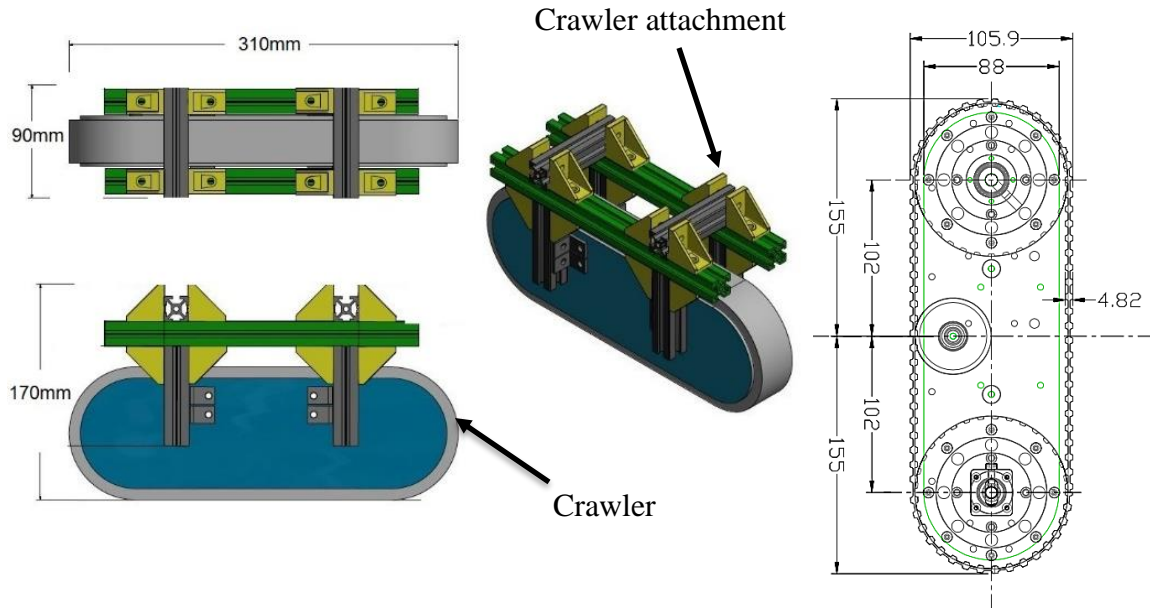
Tracked-wheel design and internal dimensions inside the tracked-wheel unit
